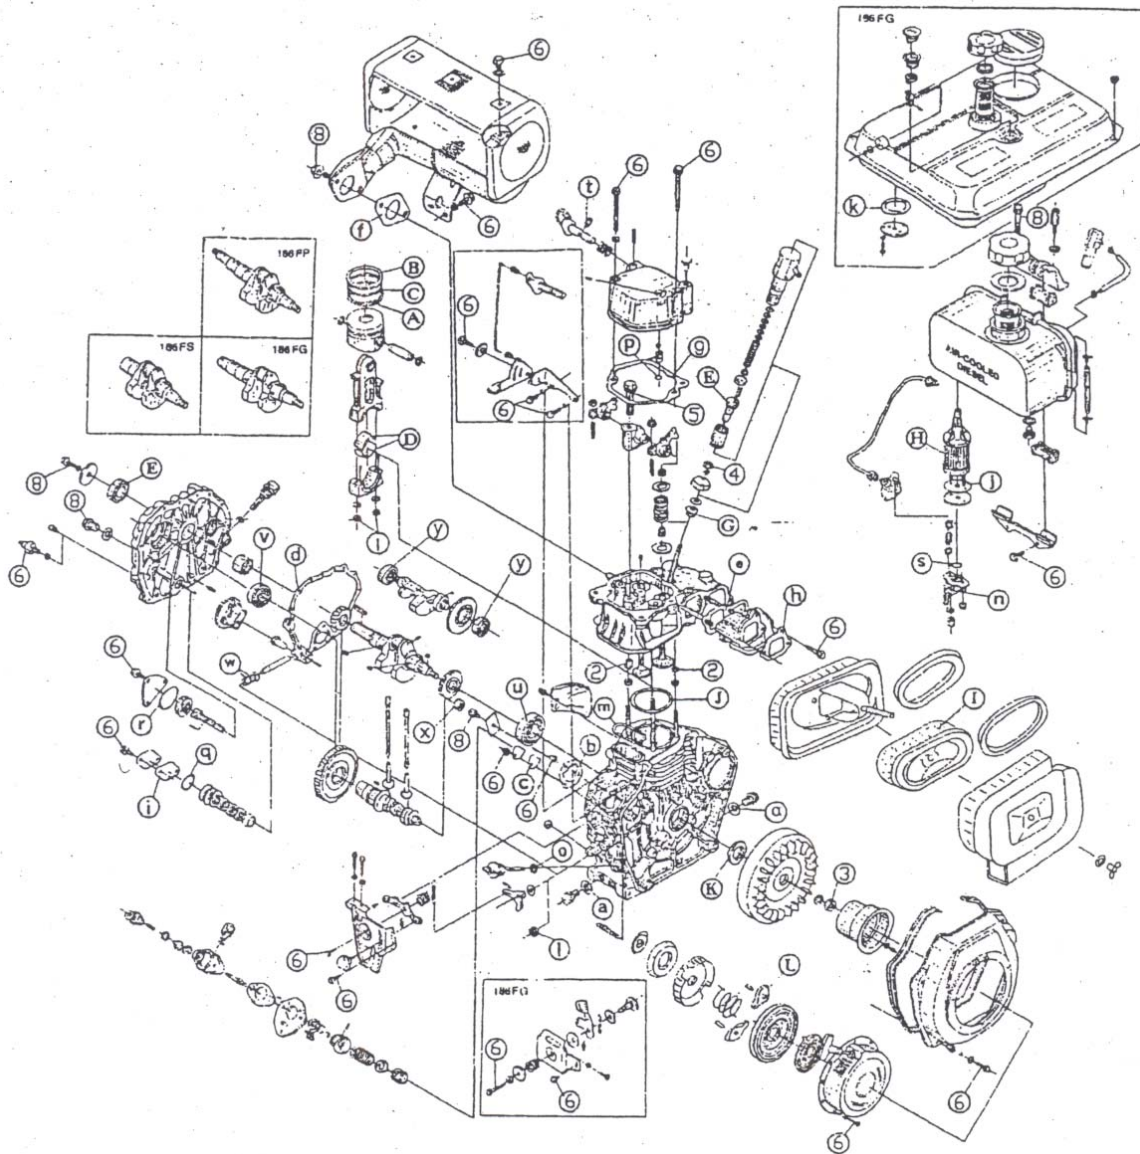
Please refer to your engine owner's manual for a complete parts list.
